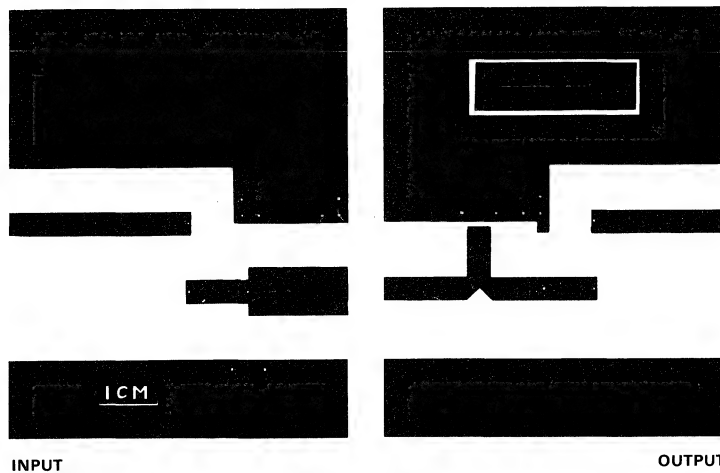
PRINTED CIRCUIT BOARD LAYOUT
